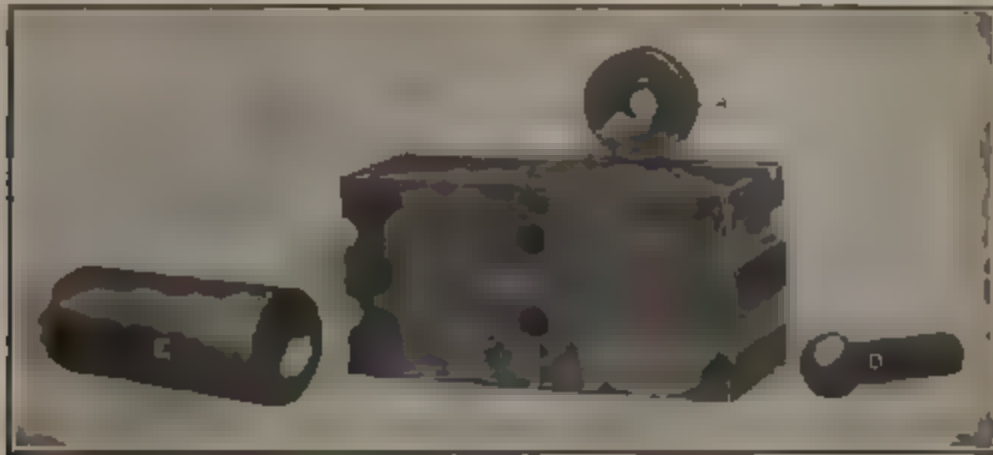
Type of Dies and Tools used in Bolt and Rivet Making Machine shown in Fig. 26
